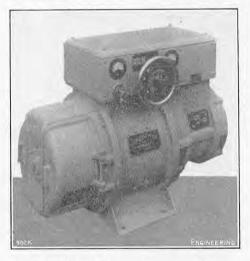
20/300-Ampere Welding Machine; A. REYROLLE AND COMPANY, LIMITED.
